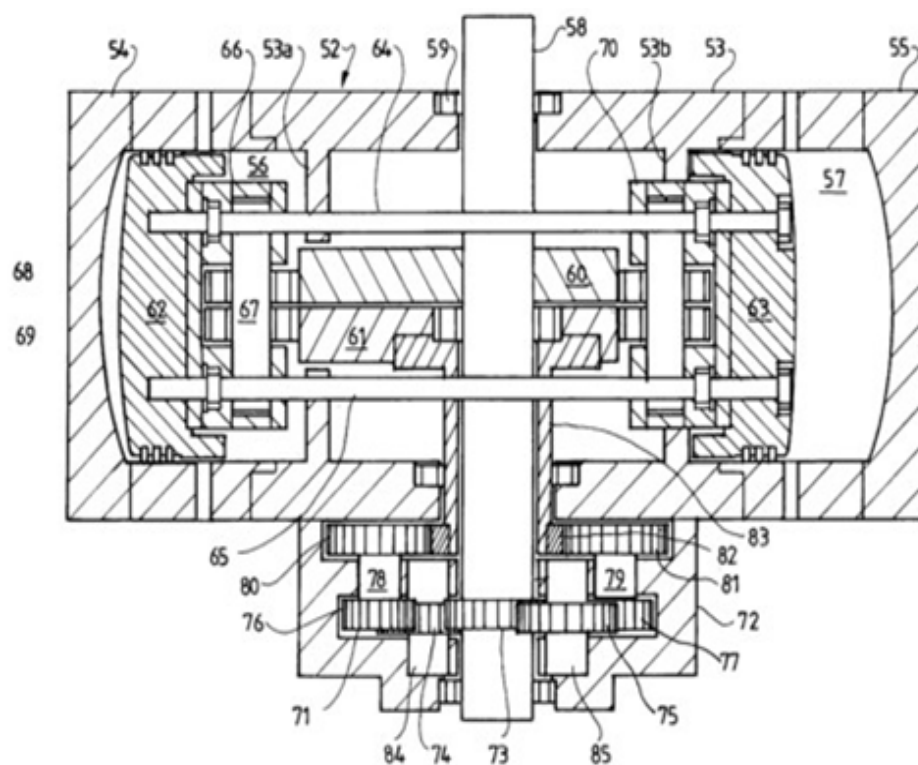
Cross-sectional view of another two-stroke engine comprising a single cylinder module with the cross-section being in the plane of the central shaft of the engine.
